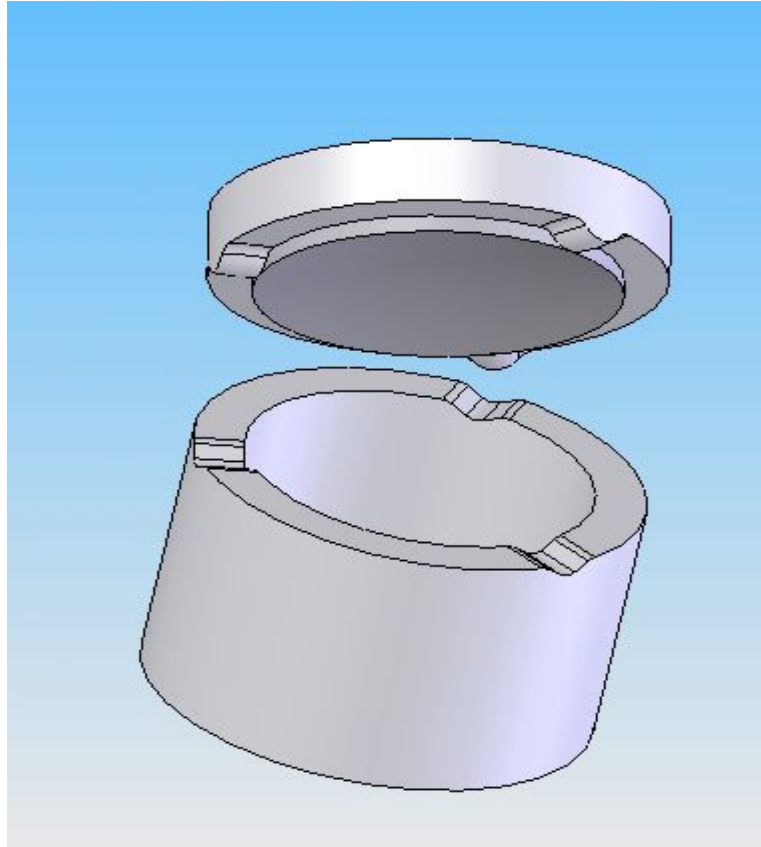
Schematic view of tube/mirror assembly with quasi-kinematic mounting features exaggerated for clarity.
